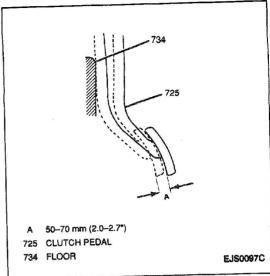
Clutch Pedal Distance From Floor For Clutch Pedal Position (CPP) Switch Adjustment
